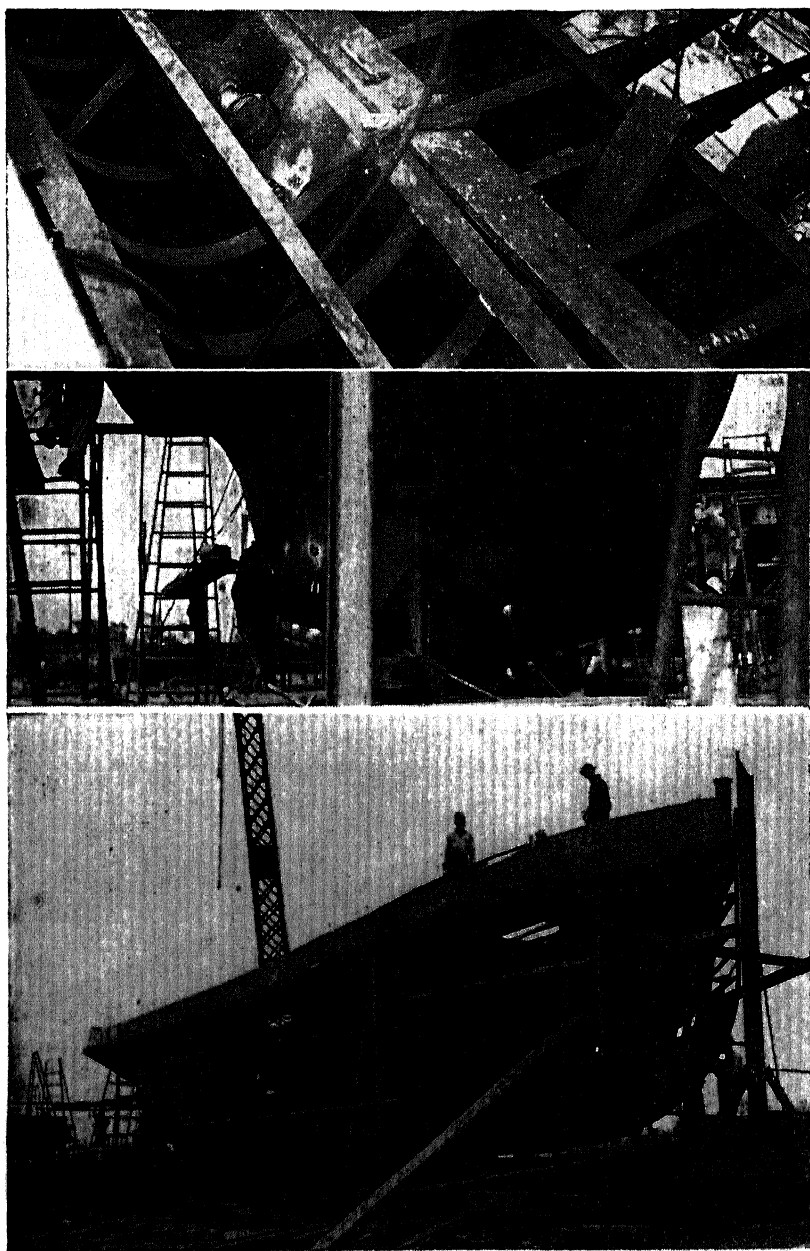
Construction views of welded steel tug. 80 ft. by 20 ft. by 9 ft. 6 in.
